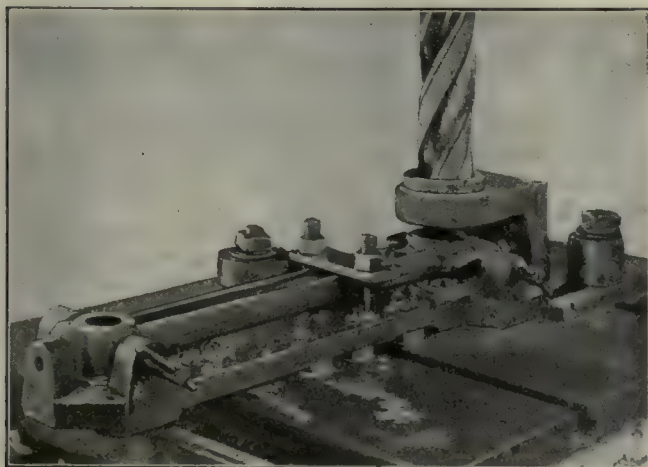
DRILLING BEARINGS OF CONNECTING-RODS
